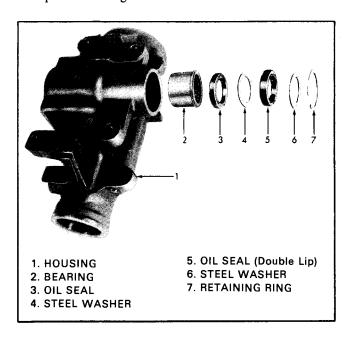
Exploded View of Pitman Shaft Bearing and Seals
